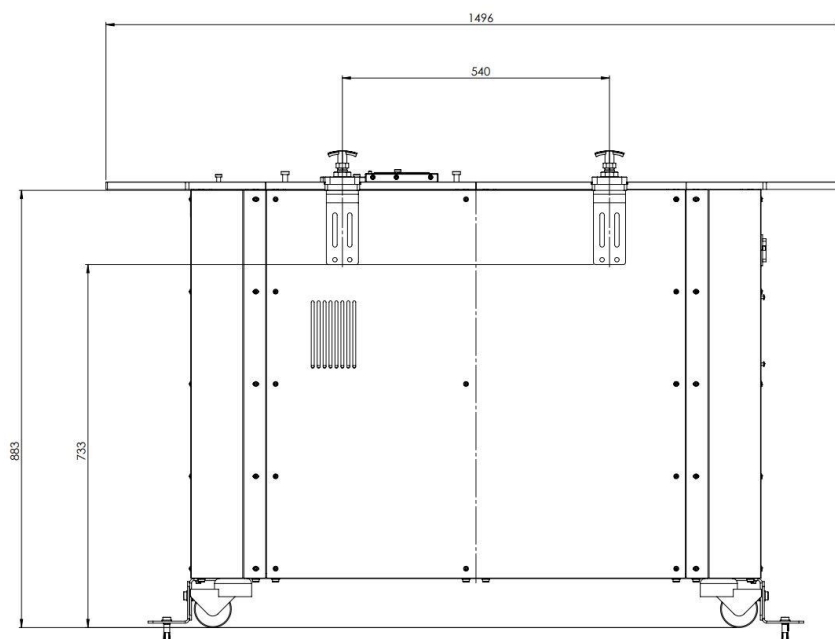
Dimensions mounting device for flange plates and machine flanges MRB L
